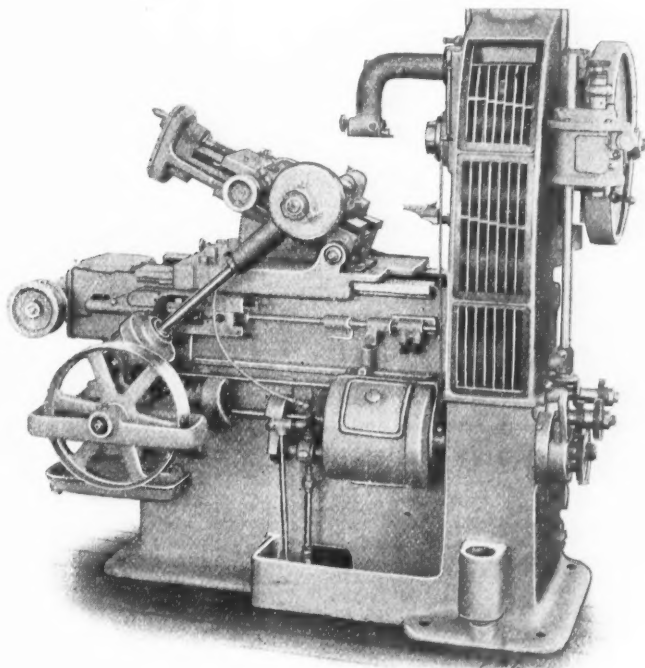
Brown & Sharpe Automatic Spur and Bevel Gear Cutter, as set up for Cutting Teeth of the latter Form.
